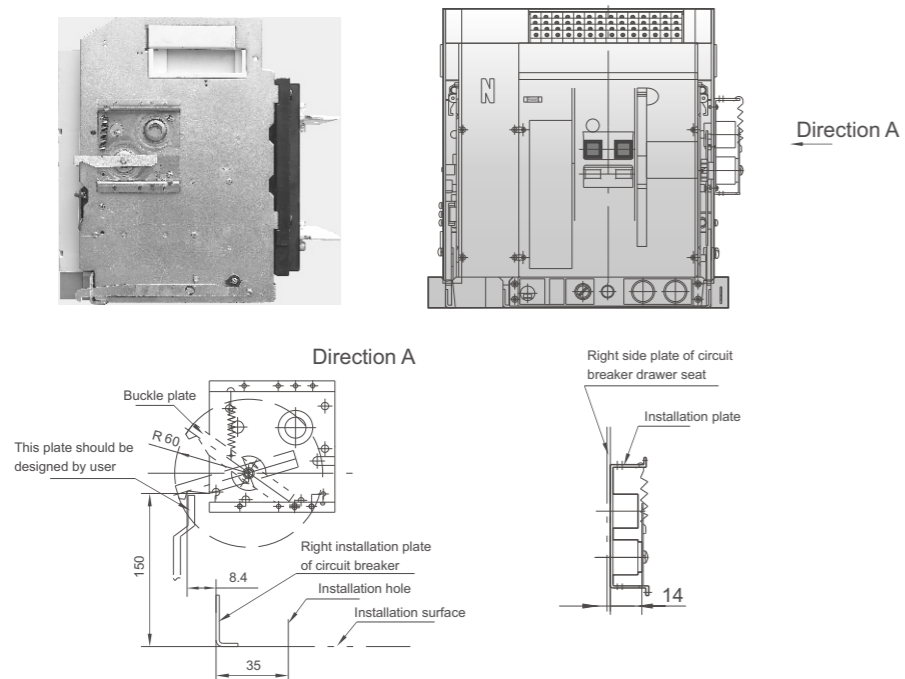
NA8-1600 withdrawable type circuit breaker status door interlock installation dimensions
